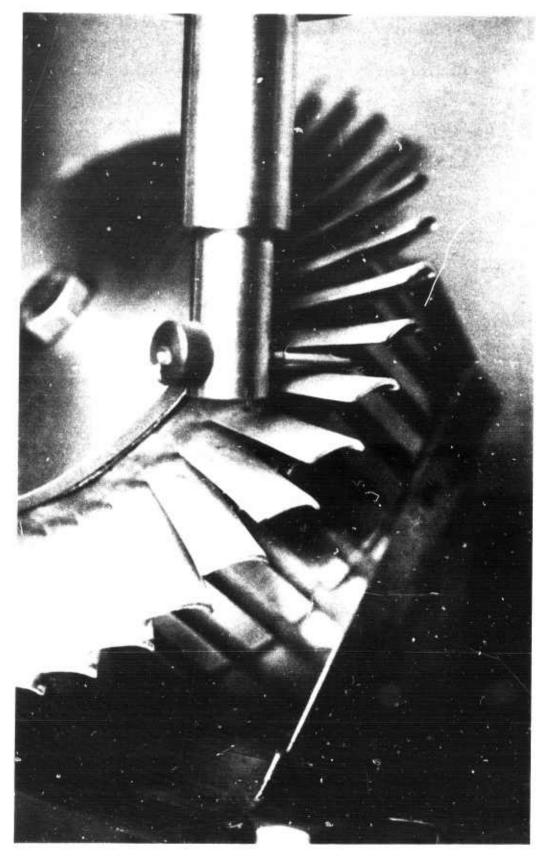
Revised Design D' Blade Bend Test Fixture.
